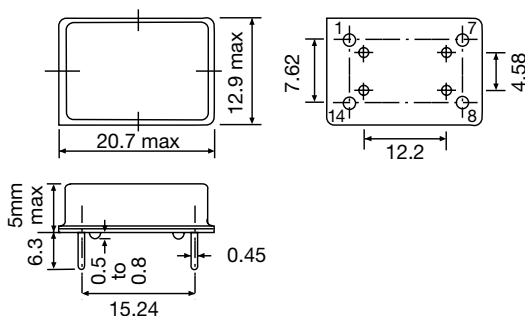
ECS-1000X Series – Top, Bottom and Side views
